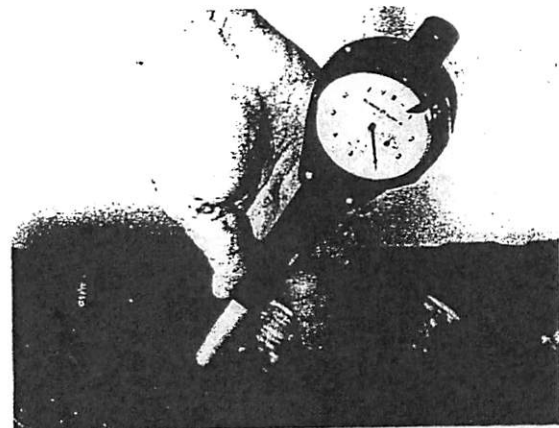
Measuring out-of-roundness with a dial bore gauge. *Courtesy of Atlas Engineering and Manufacturing, Inc.
